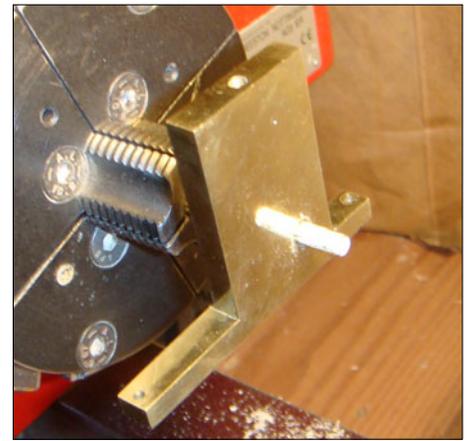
Pegging pivot hole in the carrier for a strike drum from an Elliott 9 tube mechanism.
